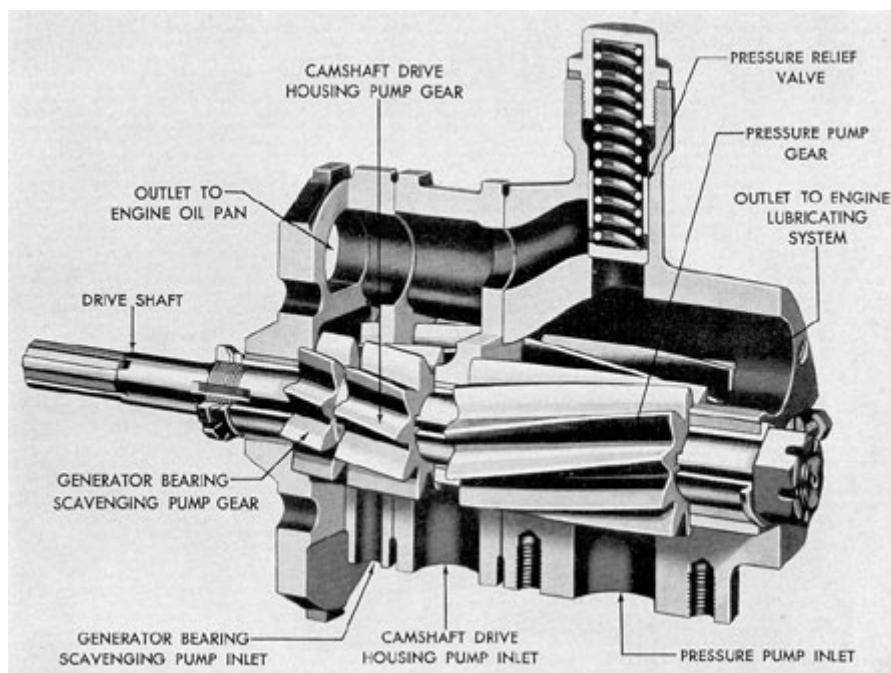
Cutaway view of GM 8-268 lubricating oil pump.
